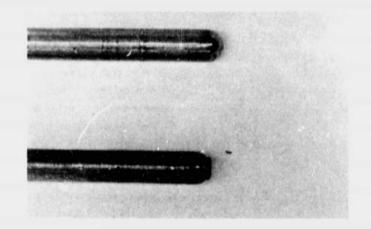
Tantalum Tubing as Cut and as Fusion Welded
